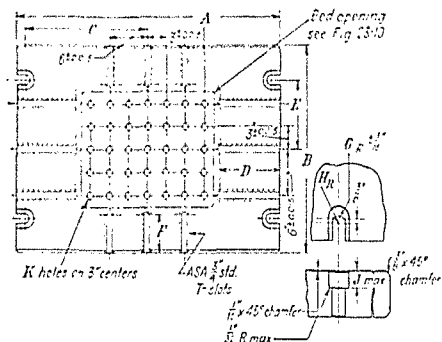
Layout of bolster plates for open-back inclinable presses.
